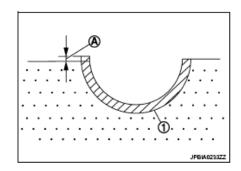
Identifying Connecting Rod Bearing Crush Height Courtesy of NISSAN MOTOR CO., U.S.A.
